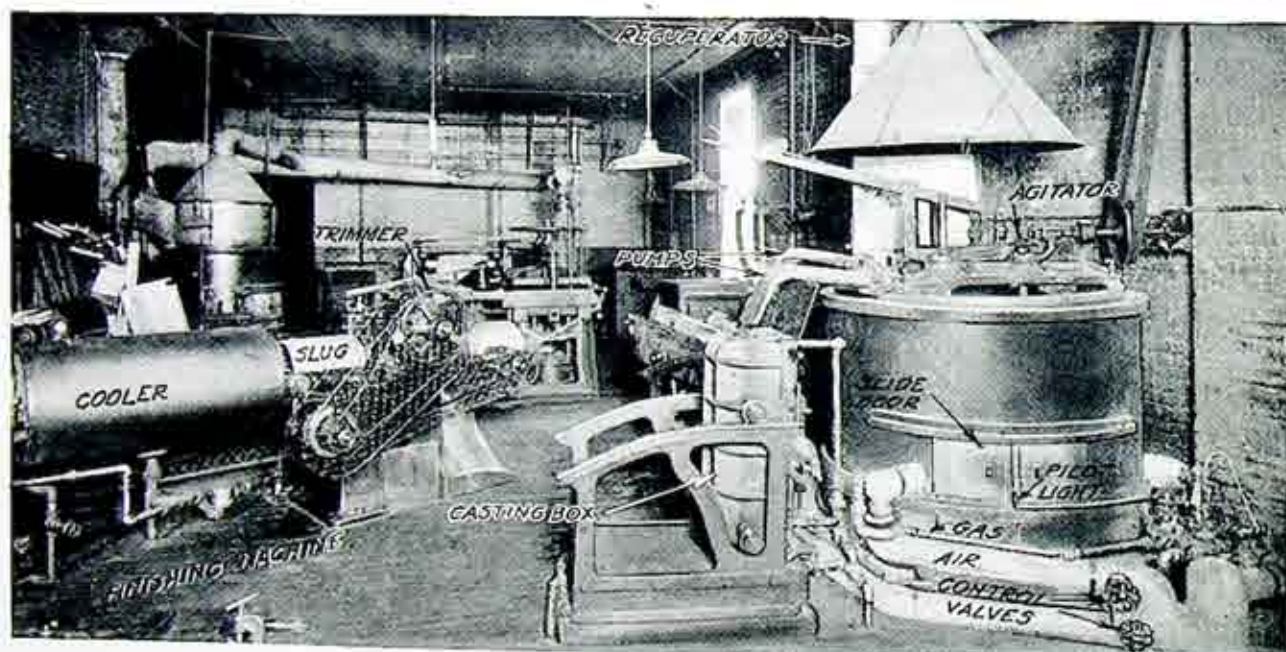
Stereotype room at "Union and Advertiser" showing gas-fired recuperative furnace, casting box and finishing machine.
